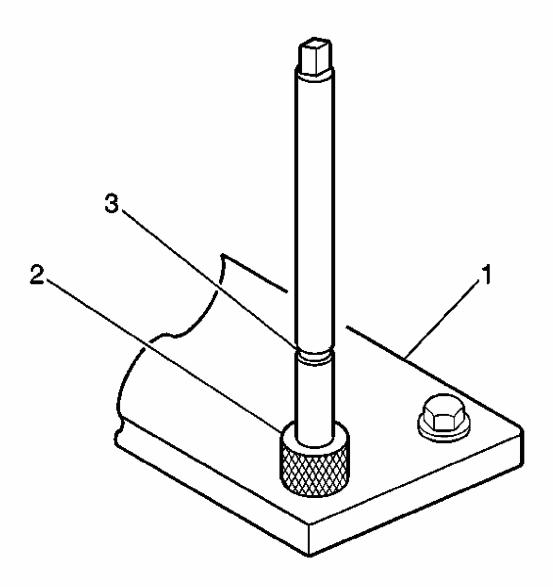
View Of Fixture Plate, Drill Bushing & Tool Marking Courtesy of GENERAL MOTORS CORP.
